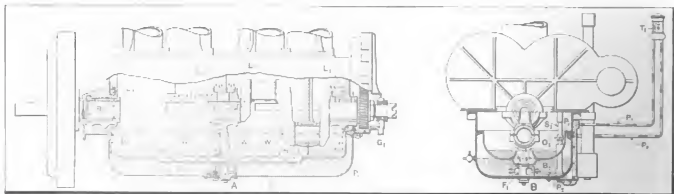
National, showing a section of the motor and method of lubrication, with a gear pump in bottom of case
